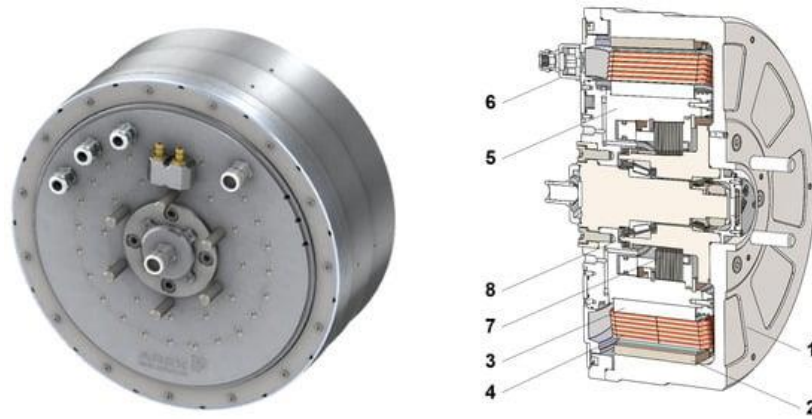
DWH-200 permanent-magnet synchronous motor wheel developed by AREX Sp. z o.o.: 1-rotor, 2-magnets, 3-stator's magnetic core, 4-stator winding coils, 5-supporting structure, 6-entry for supply wires, 7-wet brake, 8-bearings system. Source: Arex
